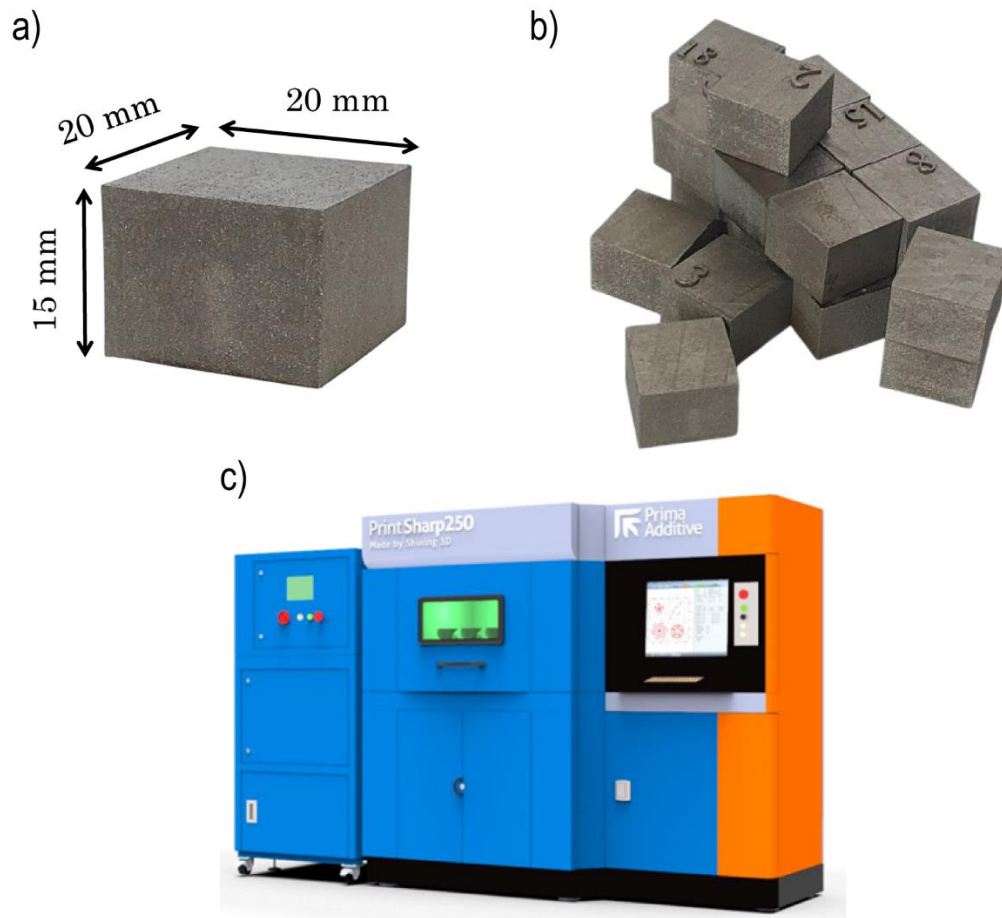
a) geometry of the printed samples. b) schematic of printed samples. c) schematic of PrintSharp 250, a PBF machine
